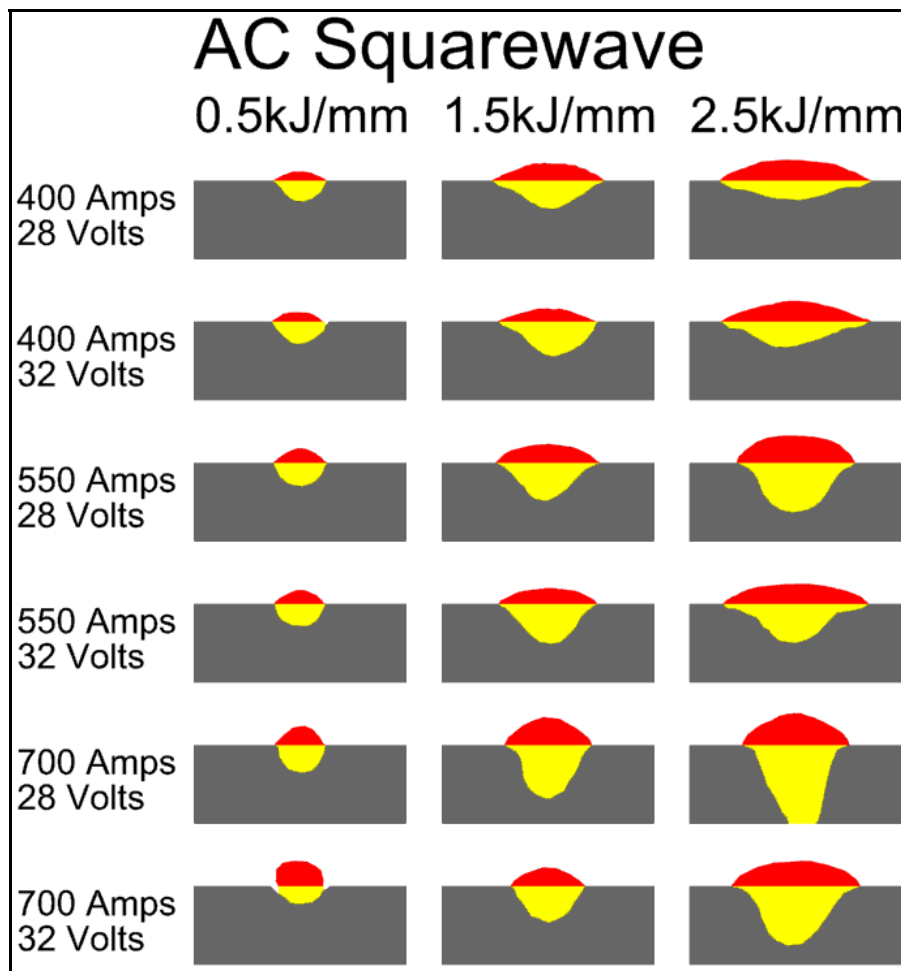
Group 1 AC-SQ Weld Bead Cross-Sections
